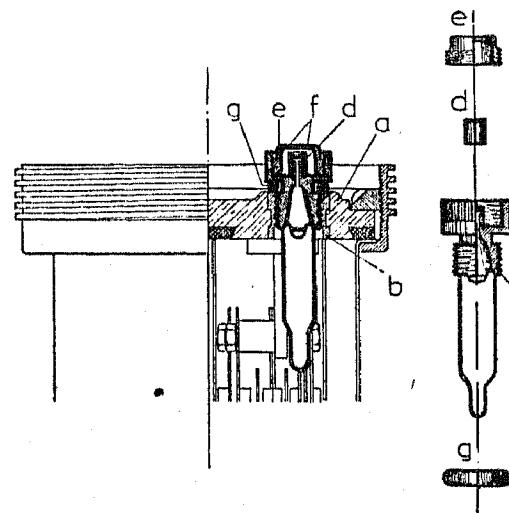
Combination valve filling hole plug and electric level indicator.
